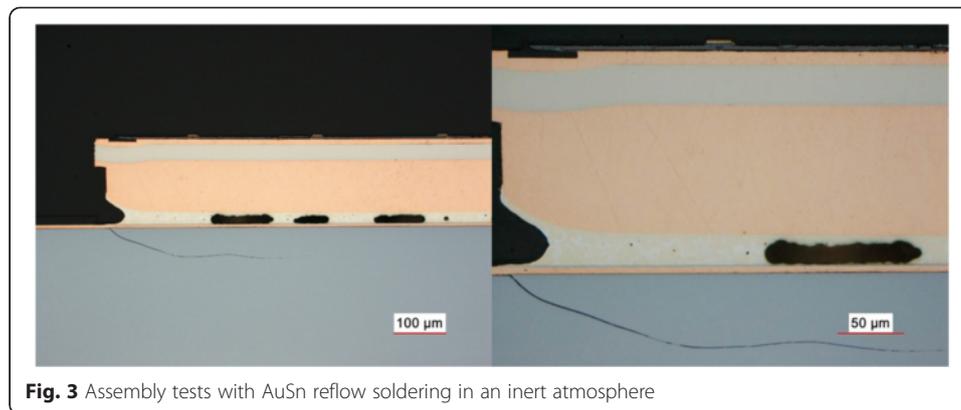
Assembly tests with AuSn reflow soldering in an inert atmosphere
